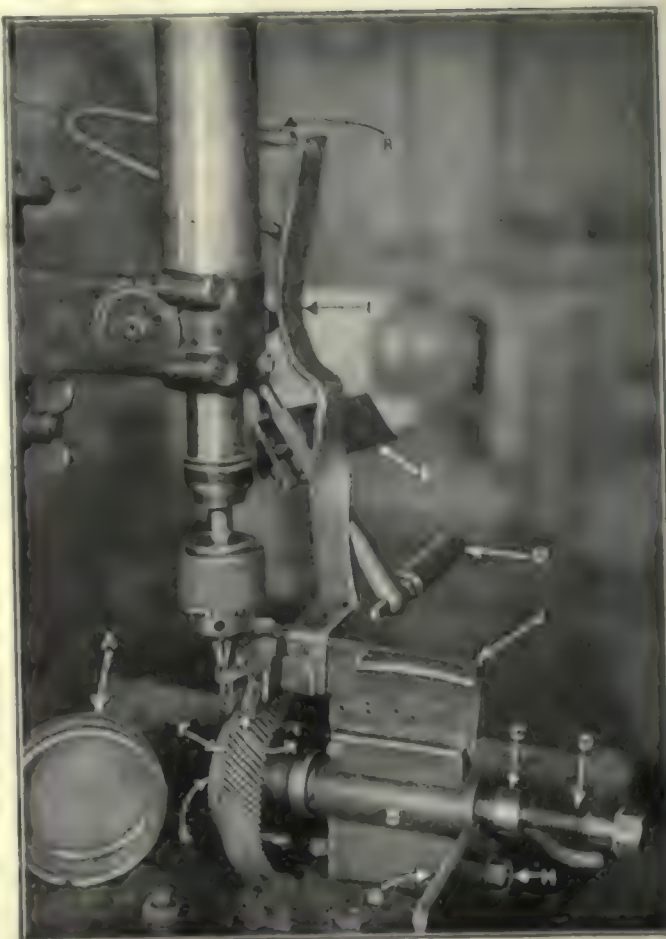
FRONT VIEW SHOWING OPERATING MECHANISM
